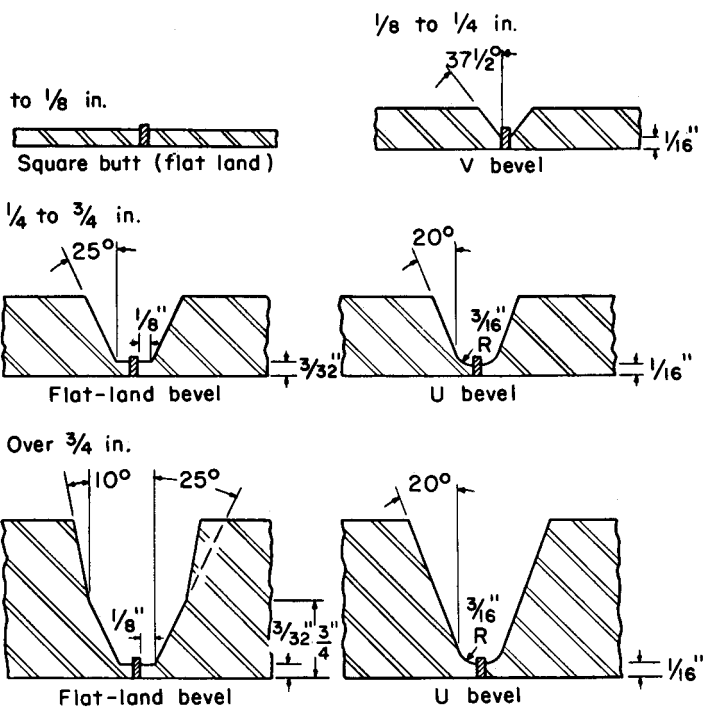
Typical end preparations for pipe which is to be welded by the inert-gas tungsten-arc welding process.
